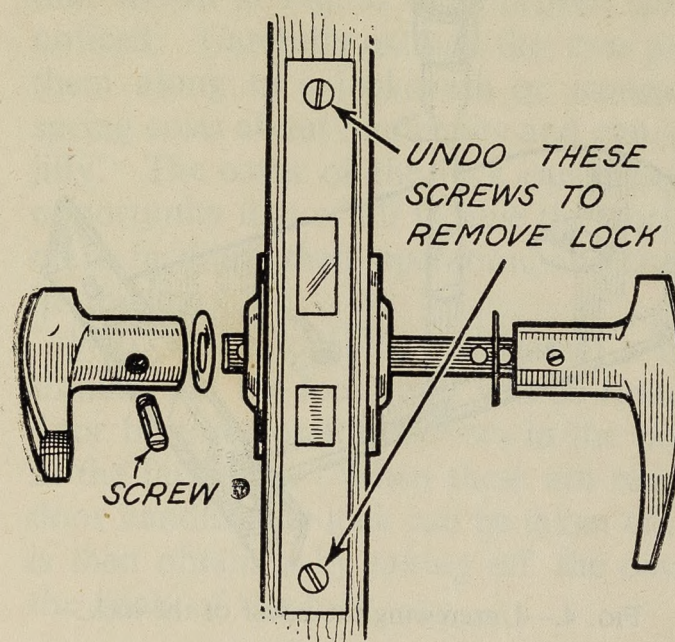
Showing removal of door handles and the screws which attach the lock to the door.
